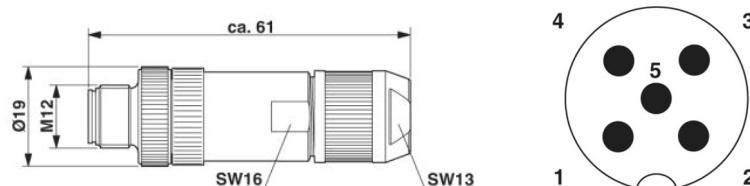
Connector M12 x 1 straight, shielded; pole arrangement: male M12, 5 pins, A-coded, view of male connector side, Phoenix nomination: SACC-M12MS-5SC SH
